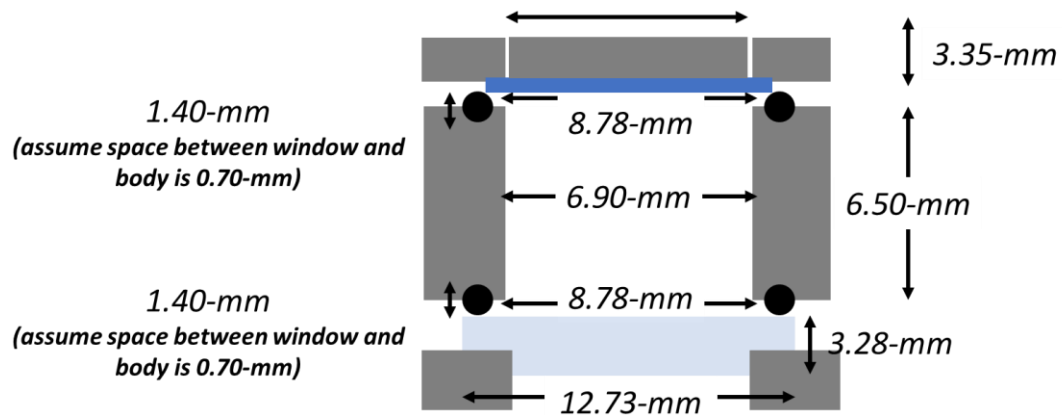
Generation 2 actuator's design and dimensions. The only moveable part of this actuator is the 0.5-mm thick silicone membrane (blue sheet) which is flexible enough to expand against the expanding wax without tearing.
